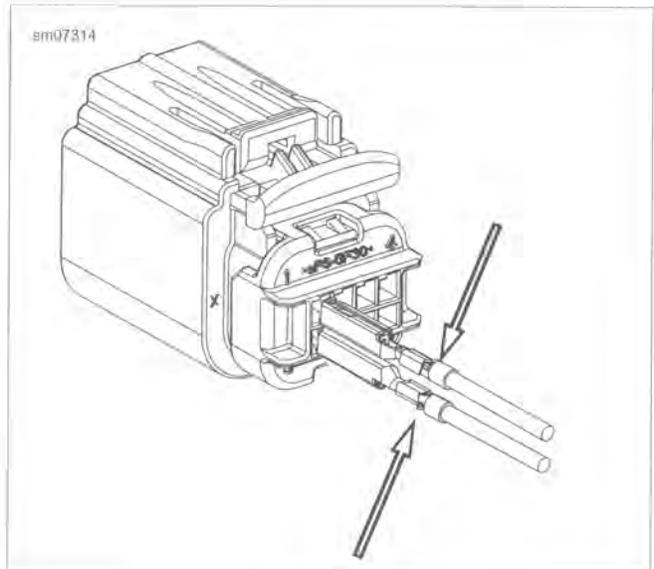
Socket Terminal Orientation: Crimp Open Side
